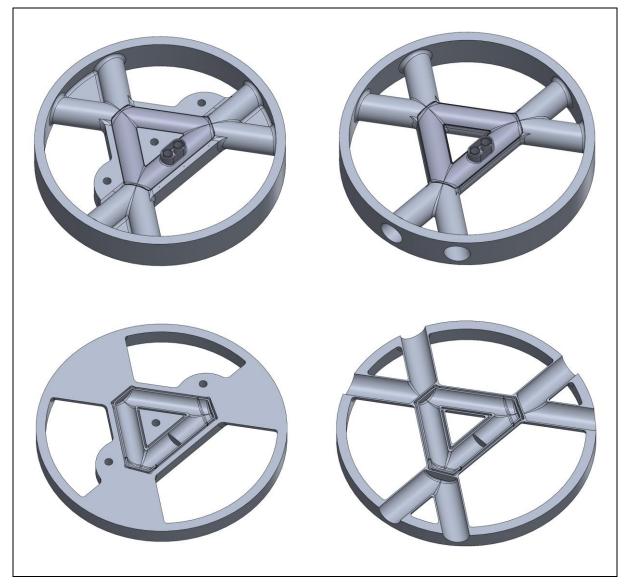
Manufacturing stages of the vacuum vessel, welding stage (left) and final machining (right)
